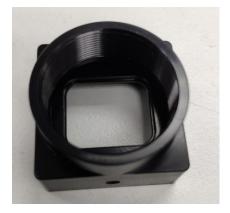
C-Mount Lens Housing Shown with an IR-Cut Filter Installed
